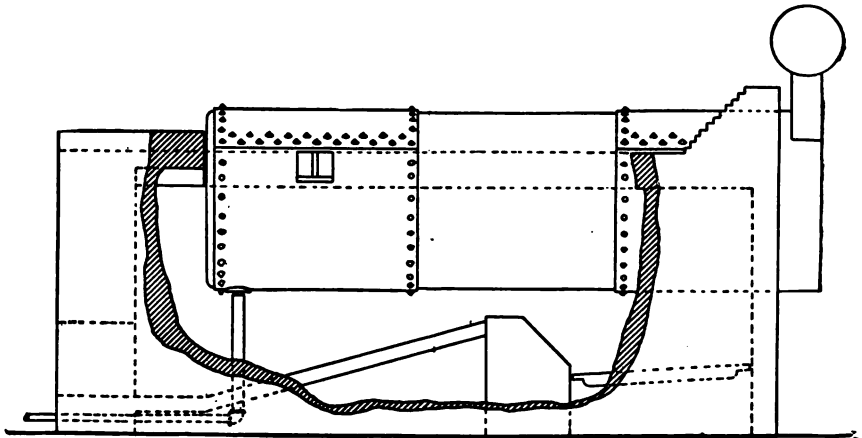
ELEVATION OF A THREE-RING BOILER.
